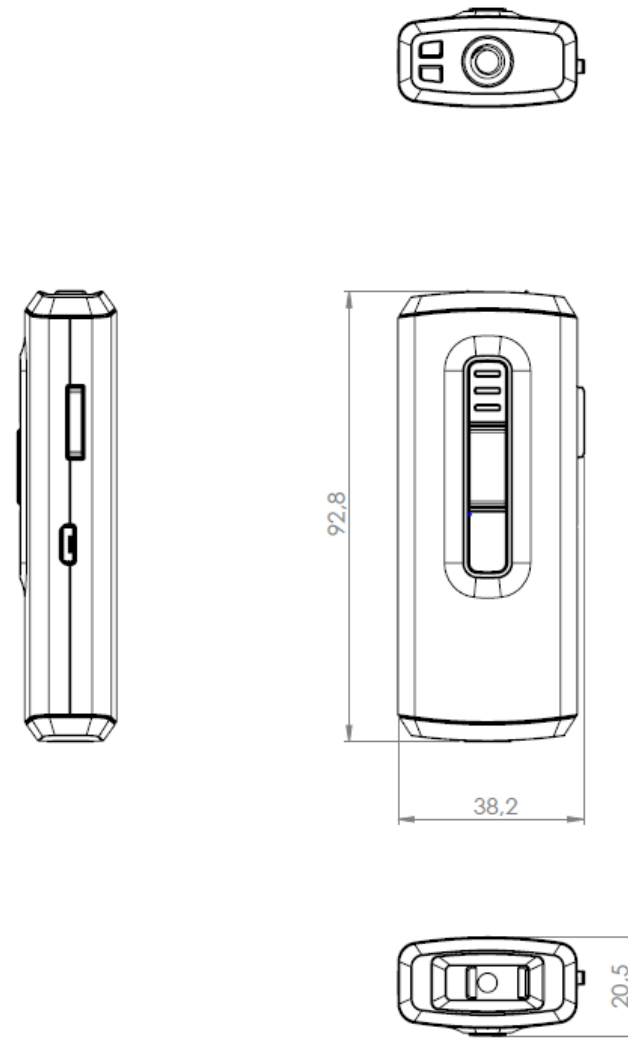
Photonfy mechanical dimensions. All dimensions are in millimeters (mm)
